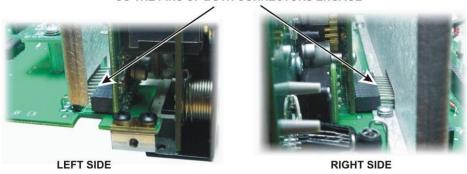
Mounting Front Panel Assembly - Connectors P50 and P51.
